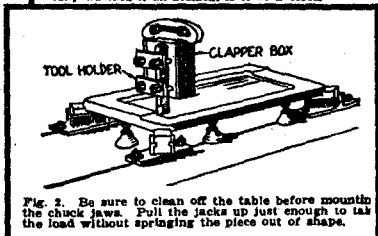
Be sure to clean off the table before mounting the chuck jaws. Pull the jaws up just enough to take the load without springing the piece out of shape.
